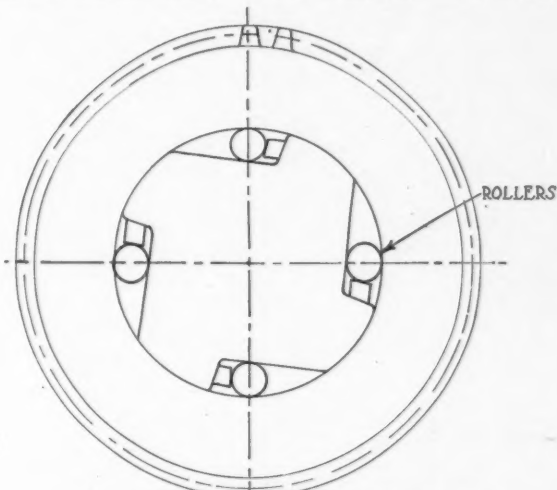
STARTER CLUTCH BUILT IN INTERMEDIATE GEAR (SEE VIEW B IN FIG. 5)
